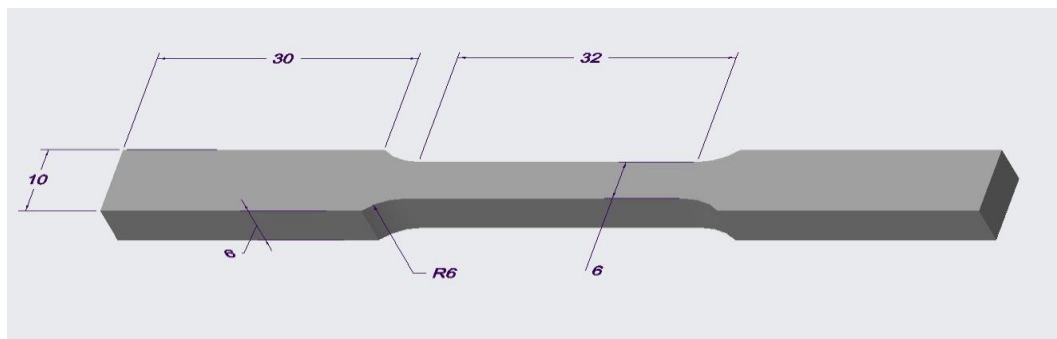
Tensile testing specimen as per ASTM E8 std.
